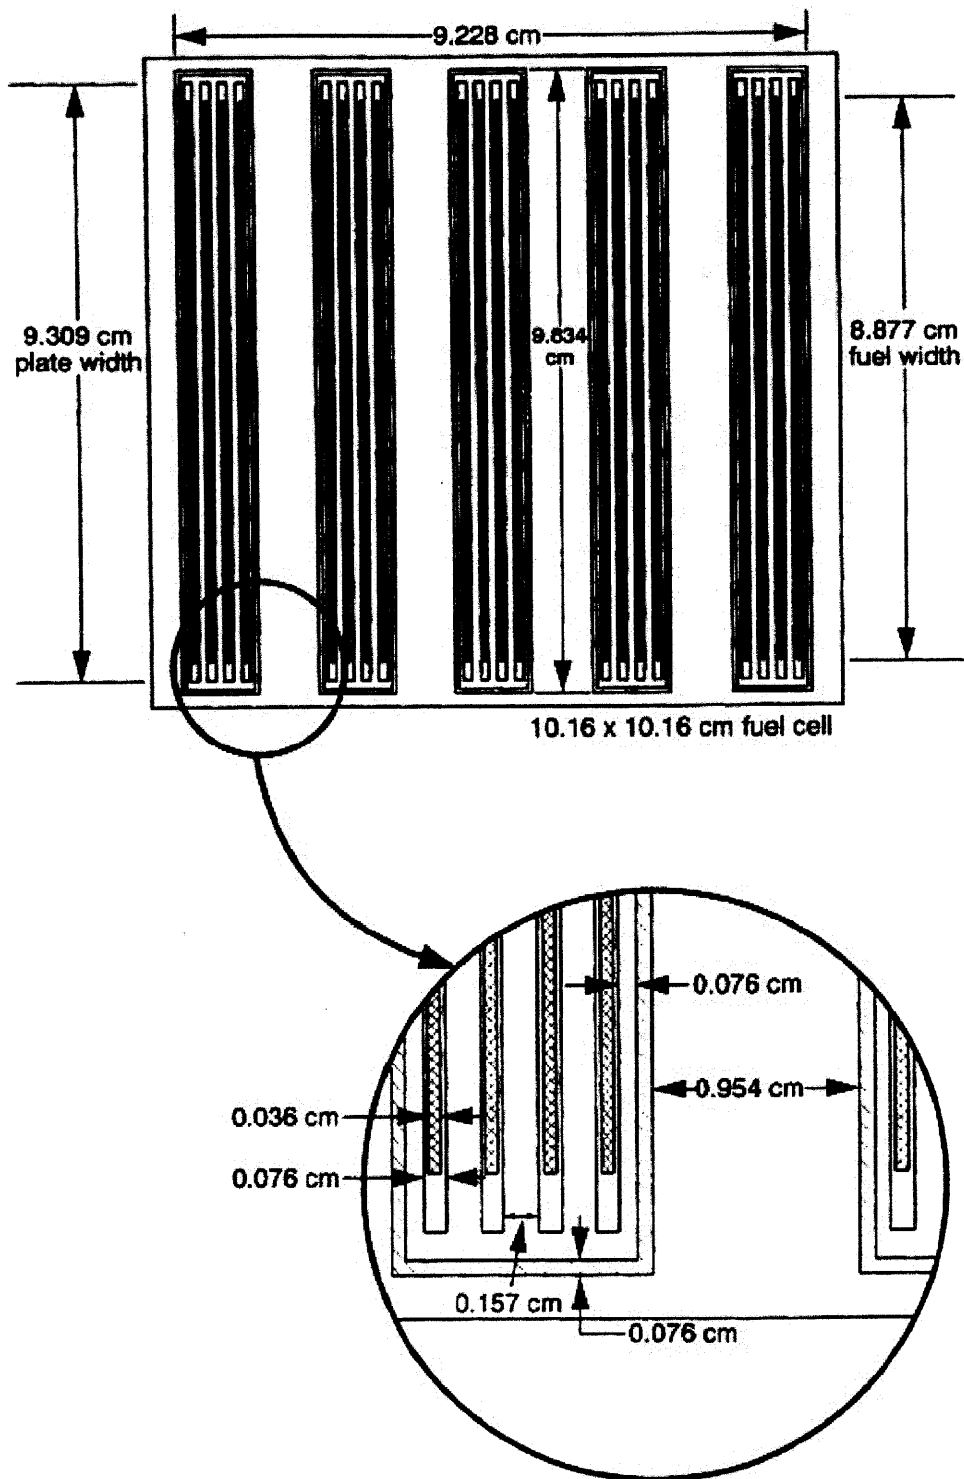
The BORAX-V superheater fuel subassembly [90].
